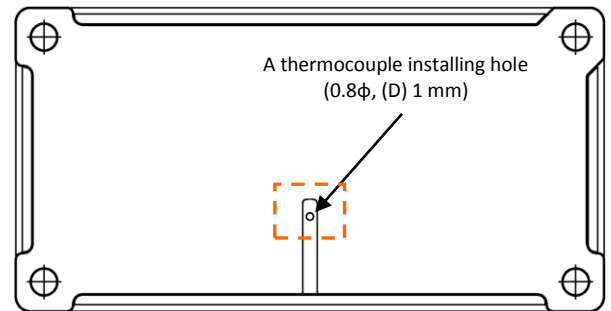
An example of a hole drilled on the base plate (bottom view)
